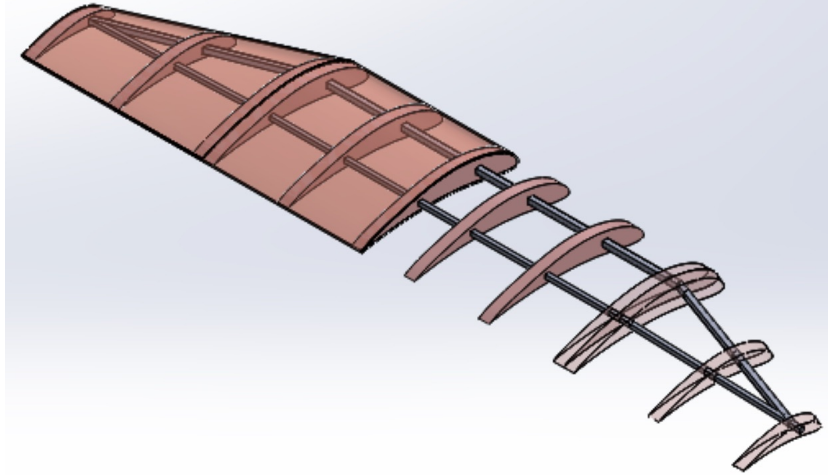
Main wing rib and spar frame assembly modeled in SOLIDWORKS.
